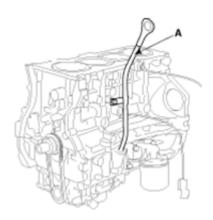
Identifying Oil Level Gauge Assembly Courtesy of KIA MOTORS AMERICA, INC.
